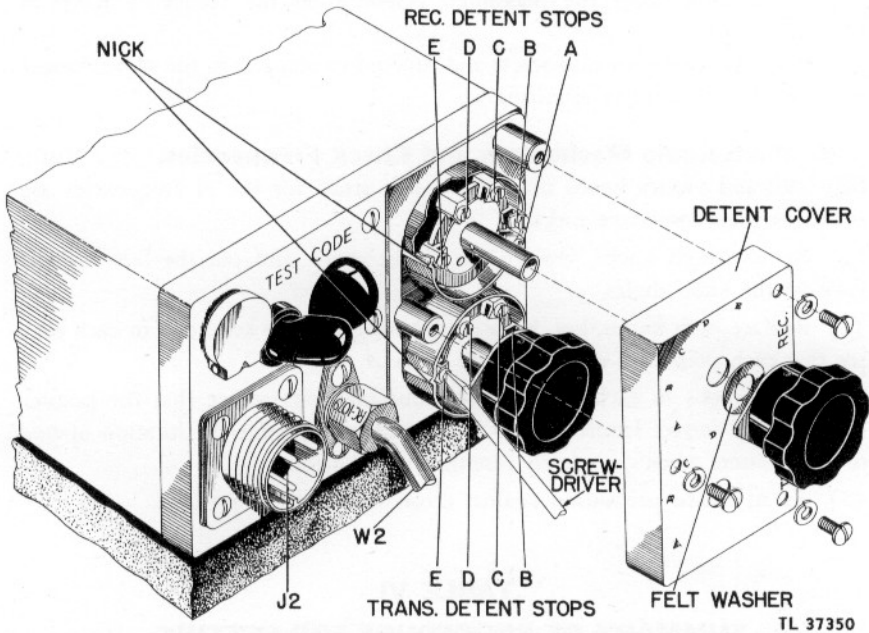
Exploded view of frequency-selector mechanism. (Note that TRANS knob and screwdriver are shown in position for adjusting the detent stop for frequency E).
